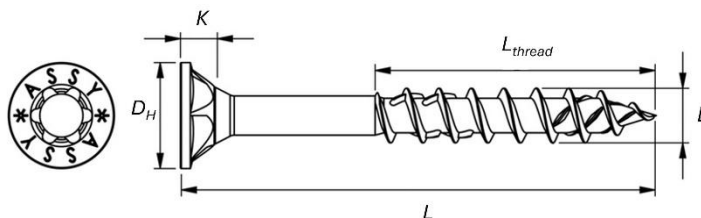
ASSY 4 SCREW WITH COUNTERSUNK HEAD WITH MILLING POCKETS (CSMP)
